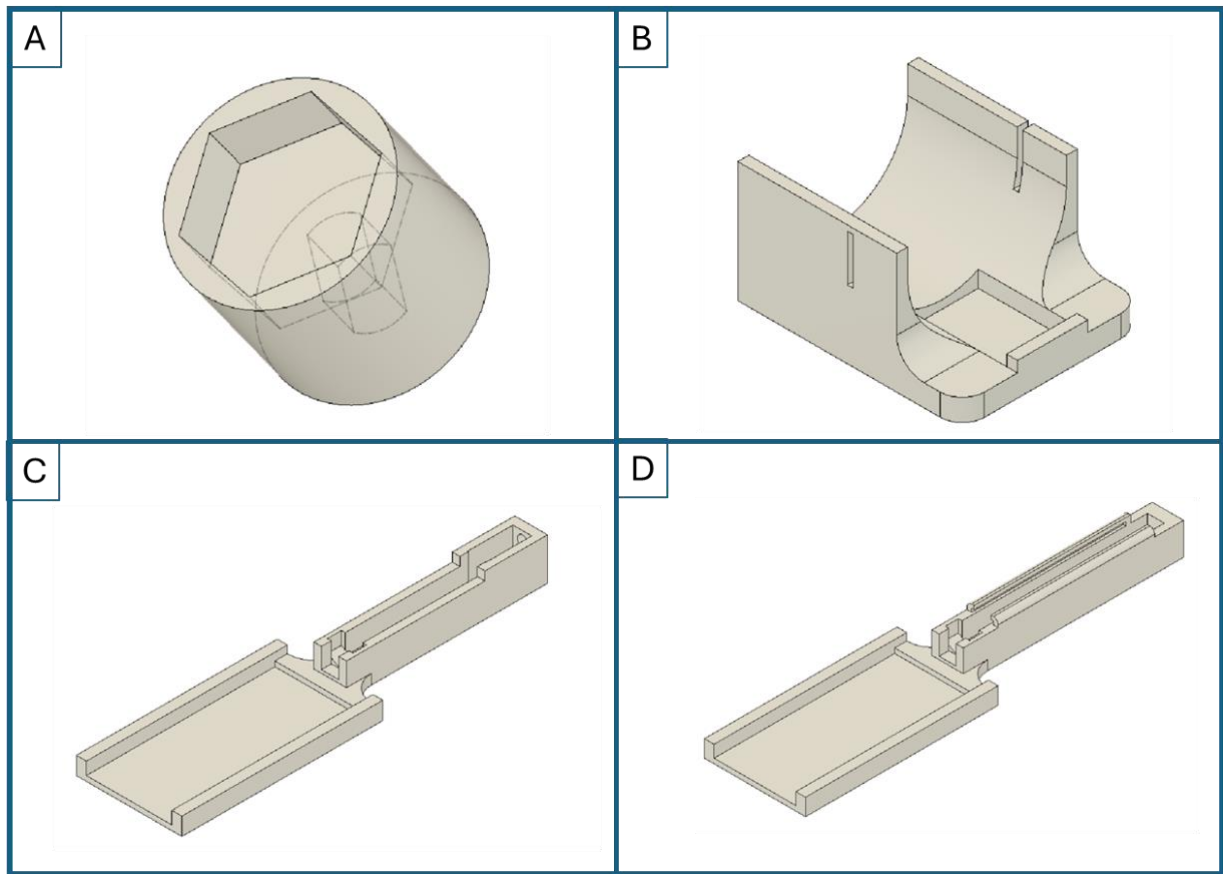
Primary components of housing. (A) Bolt adapter. (B) Motor enclosure. (C) Housing of load cell prototype. (D) Housing of calibrated spring prototype.
